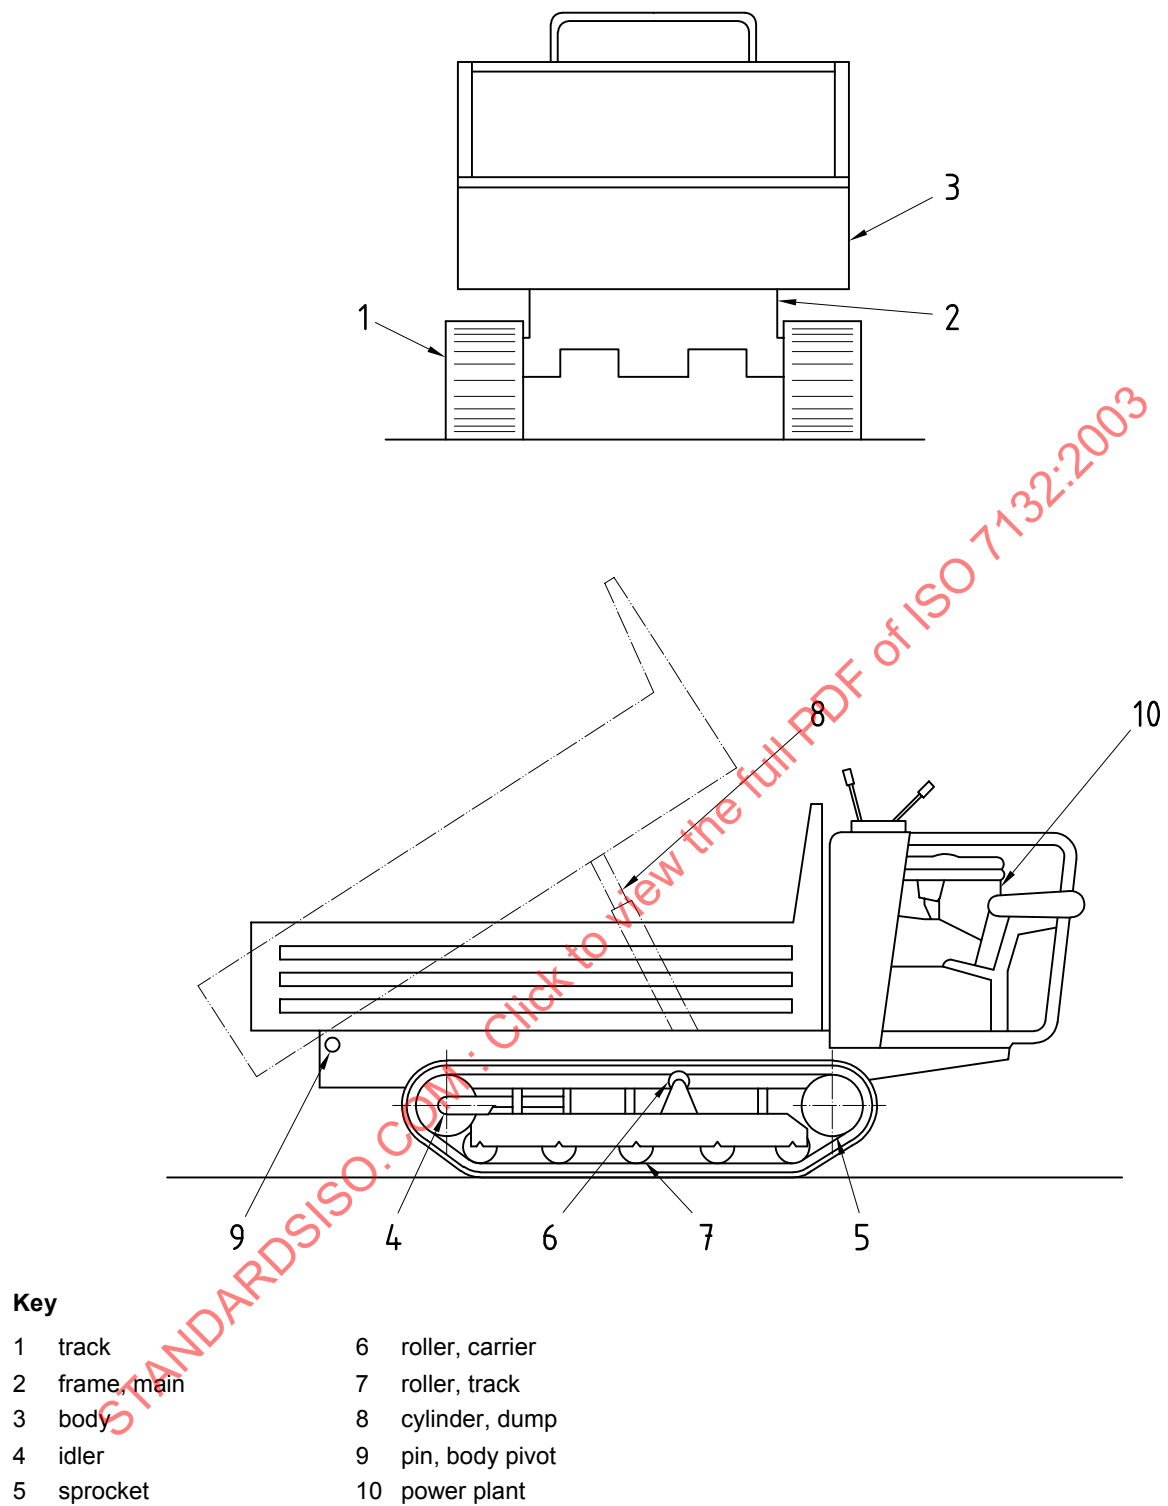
Component nomenclature — Crawler compact dumpers without canopy
